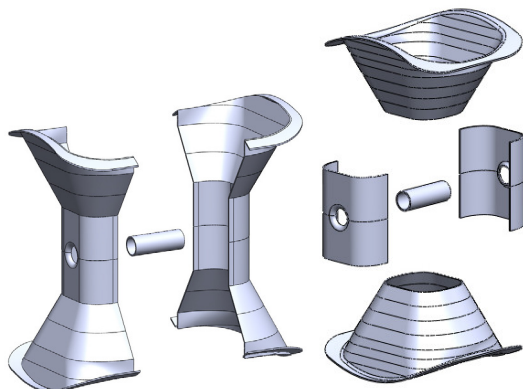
Fabrication plans for spokes divided into 2 parts except for beam pipe (left) and into 4 parts (right).
